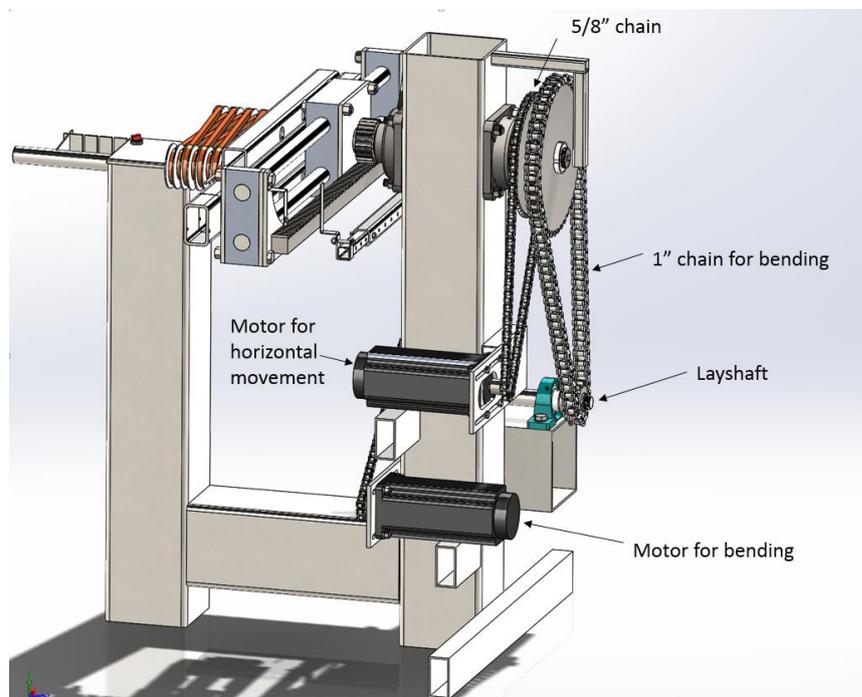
Flange mounting of the Nema 51 stepper motor.
